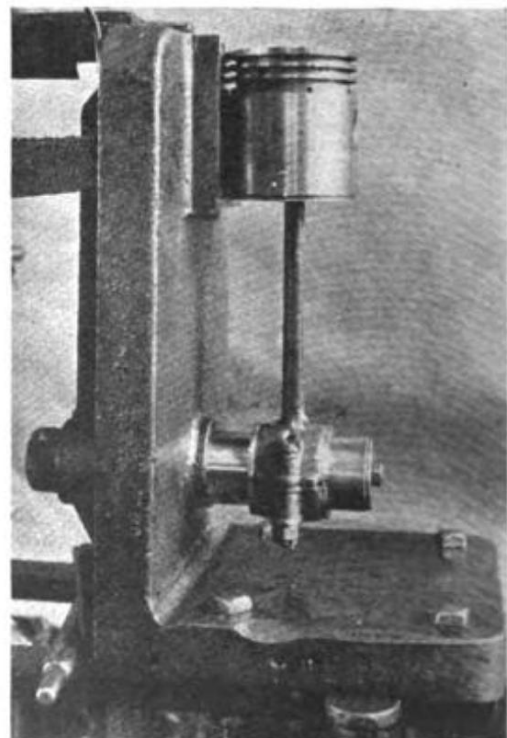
Factory Method of Assuring Rod and Piston Parallel With Cylinder
